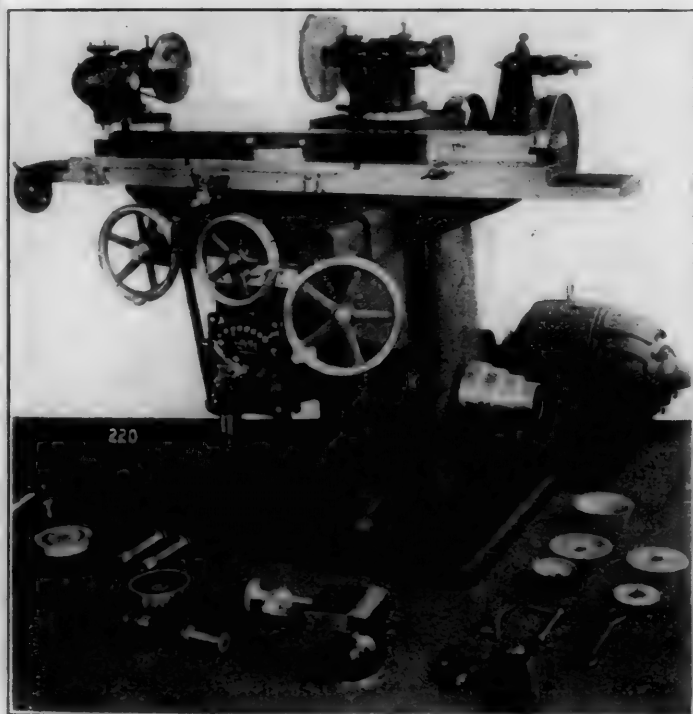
NO. 2 CINCINNATI UNIVERSAL CUTTER AND TOOL GRINDER.
